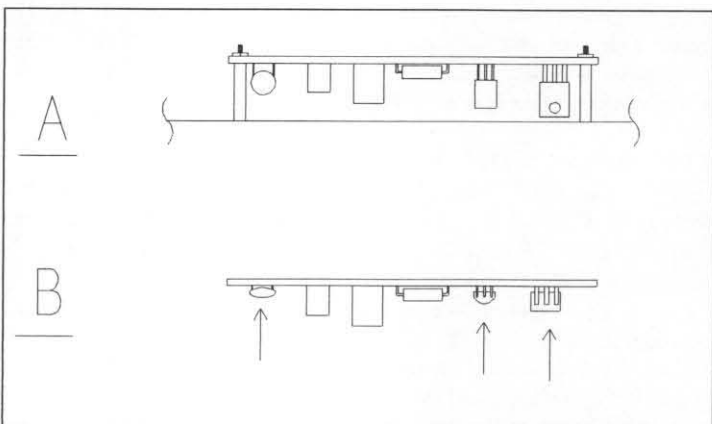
Spacers on 4 corners of PCB at A protect components from damage when board is upside down for soldering. Board at B is not protected, and several parts have been bent over, possibly resulting in damage.
